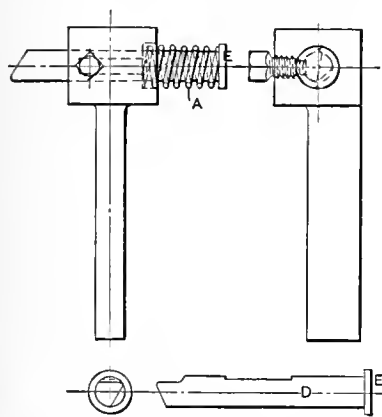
Tool held in Tool-post on Cross-slide in Turret Lathe, for Finishing Casting in Fig. 1.
